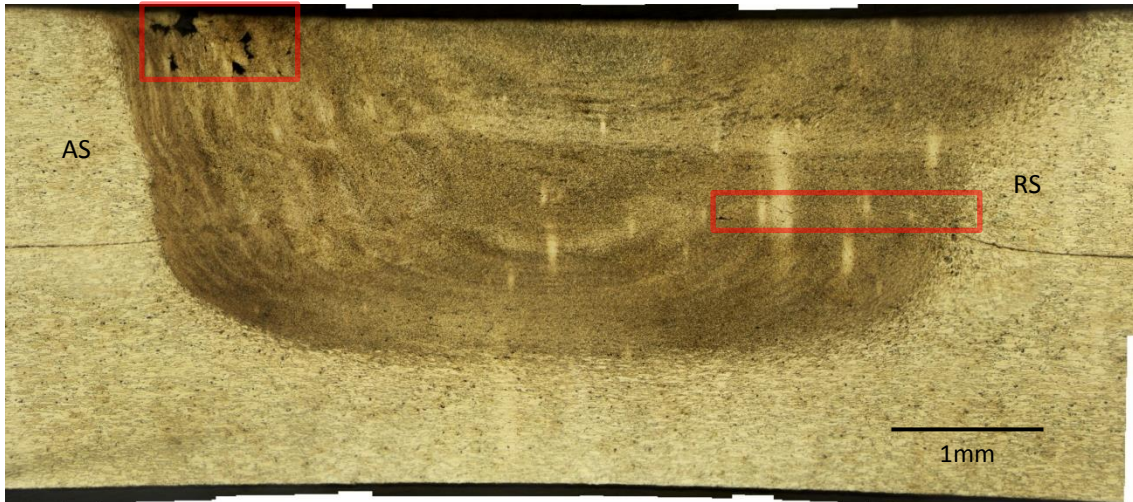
Metallographic picture of SSFSW 3797 welding sheet cross section at -1500 rpm, 8.47 mm/sec, 14.23 kN tool 3(RH)
